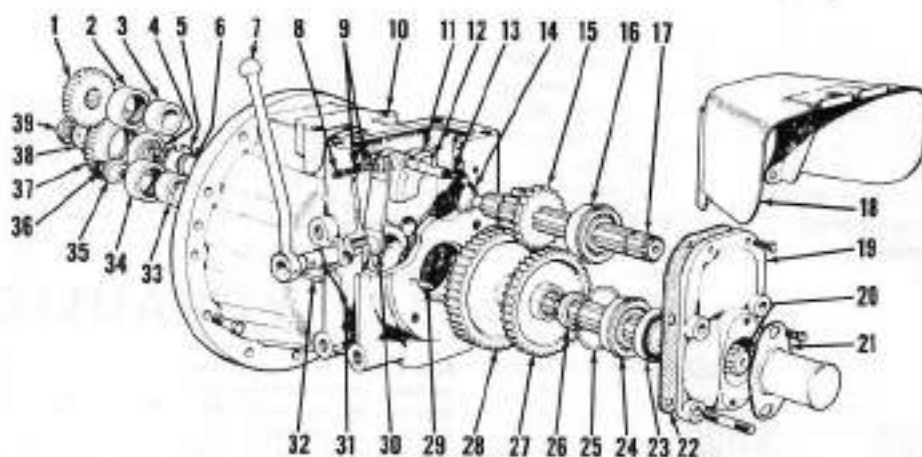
Exploded view of two-speed PTO housing and gear assembly for models 780, 880, 990, 3800 and 4600. Gear (1) on front end of input shaft (17) drives idler gear (37) mounted on stub shaft (6); idler gear drives hydraulic system pump. Shift lever (7) slides gear (15) on input shaft to engage with either low speed gear (28) or high speed gear (27) on output shaft; a neutral detent is also provided. Shims (25) were not used on early models 880 and 990.
